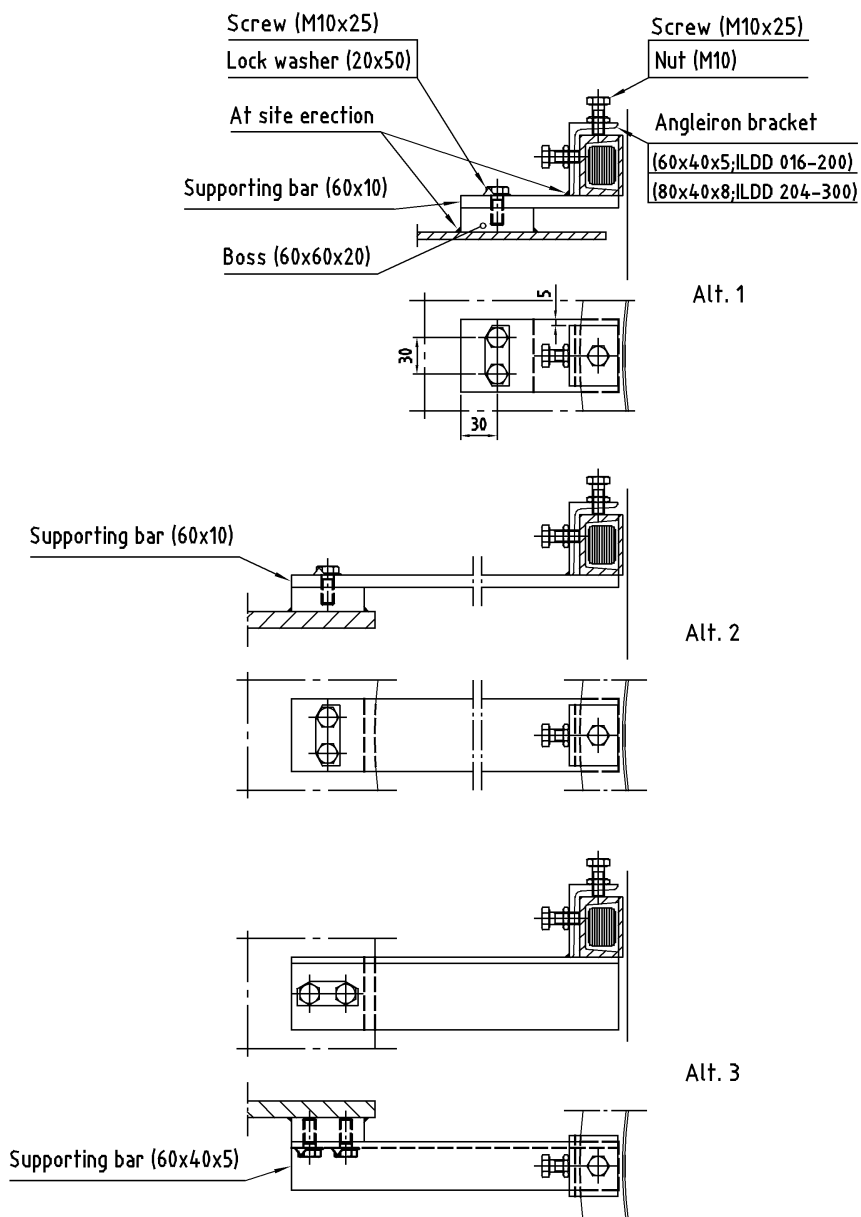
Recommended mounting of the shaft current transformer ILDD on turbo generators
